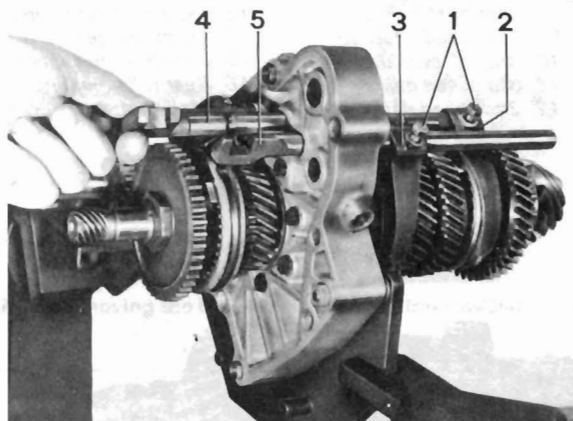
Removing lower speed selector shaft (Sec 7)
